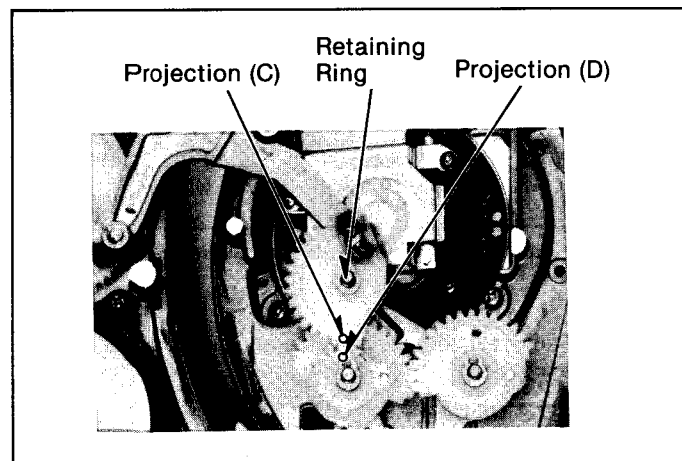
Assembly and Adjustment of Gears and Rod-(3)
